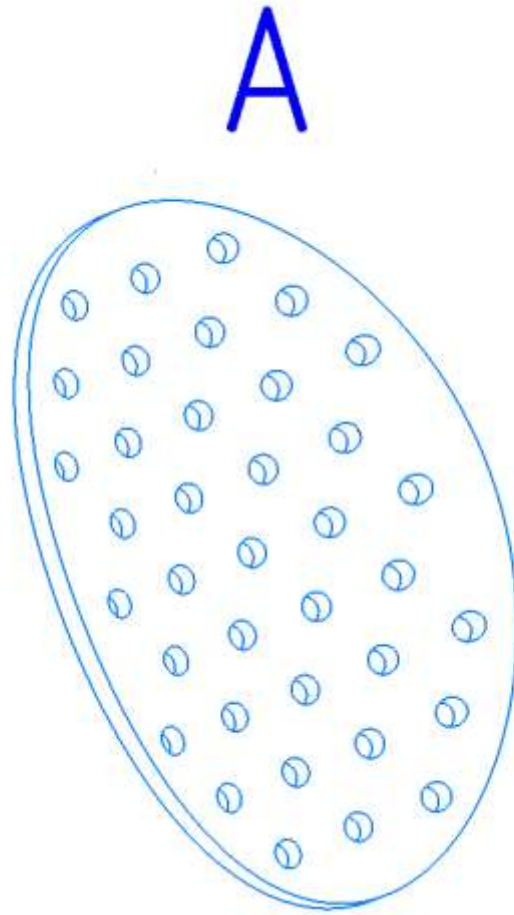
The proposed construction of the shoulder blades (the detail drawing A on figure 1)
